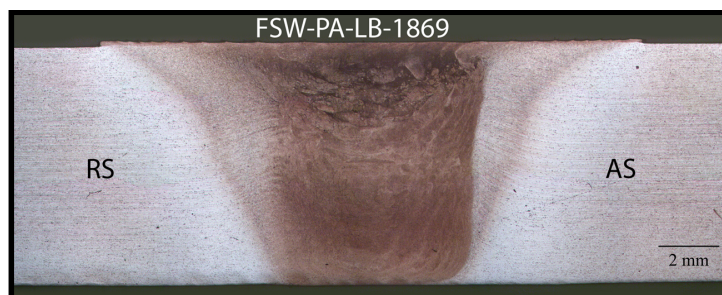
Macrograph of the weld FSW-PA-LB-1869 (8 mm/s; 1000 rpm).
